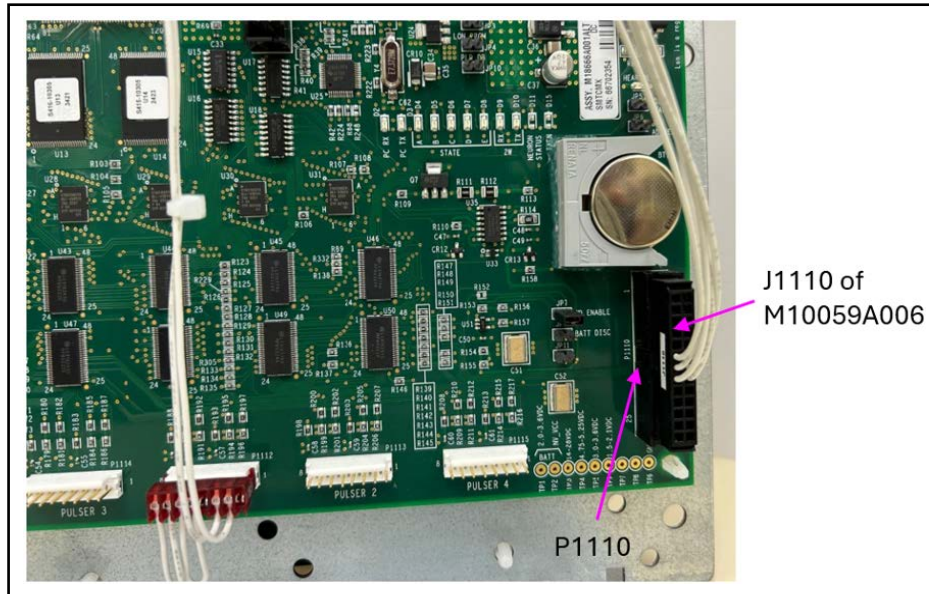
Connecting of (M00549A001) Cable to PCN Board (HF/UHF/Combo Units Only)
